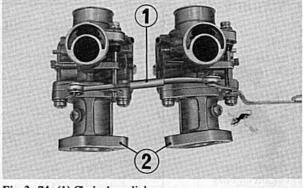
(1) Choke lever link (2) Inlet pipe
